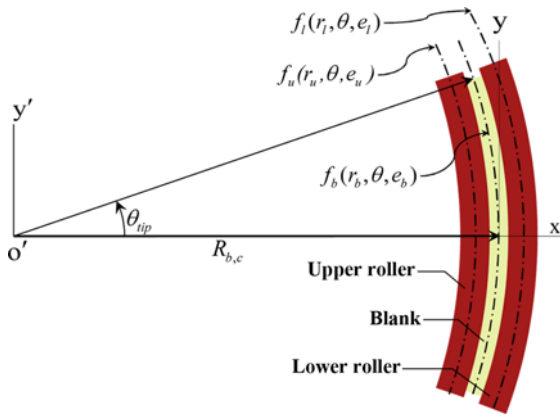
Geometrical relation of blank and reconfigurable rollers
